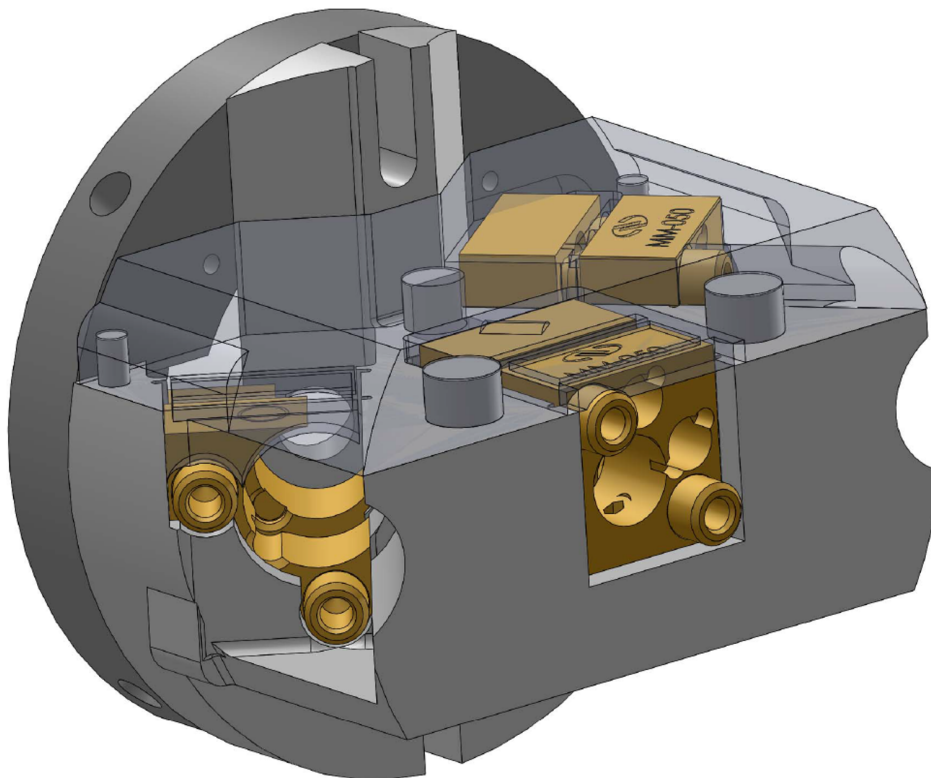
A Solid Works model of the probe holder containing the probes mounts without the probes. The probe holder is screwed into the specimen holder. Courtesy of Christian Kettenbeil.
